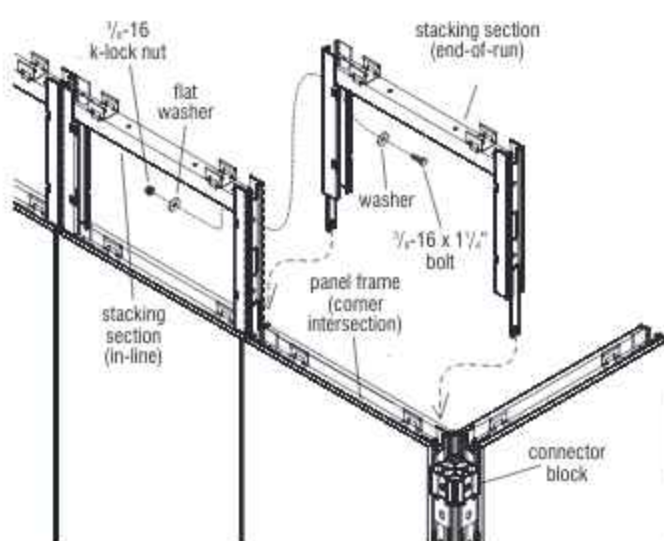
Stacking Sections (steel frame) - Intersection & In-Line Assembly
